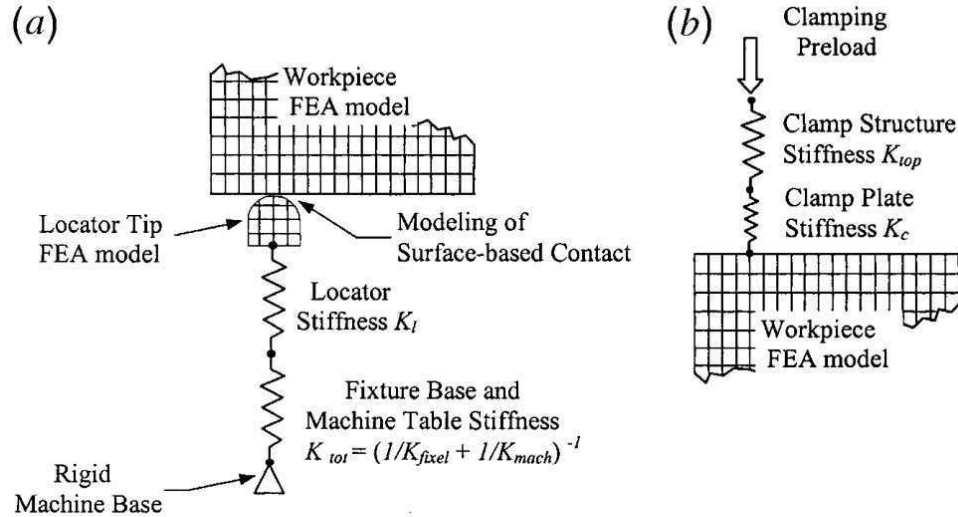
FEA modeling (a) Workpiece and locator contact (b) workpiece and clamp contact (Liao & Hu, 2001)
